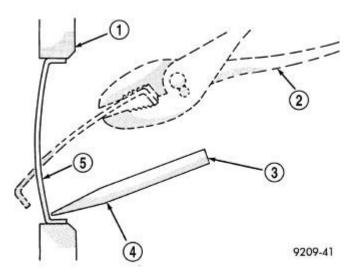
Core Hole Plug Removal Courtesy of CHRYSLER LLC
